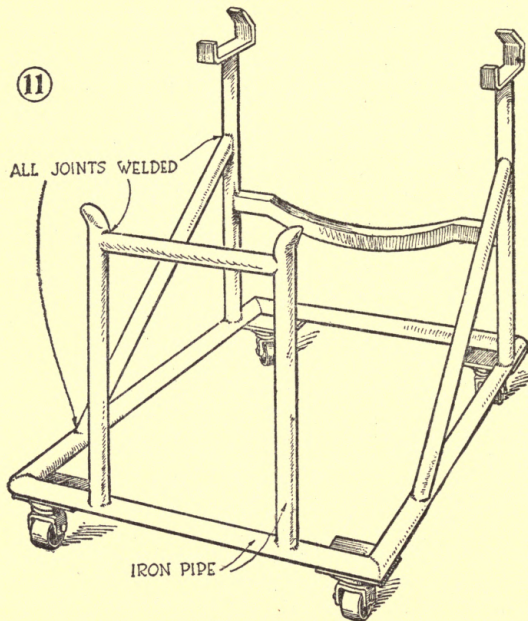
A metal engine stand made from iron pipe welded at the joints. It answers the same purpose as the wooden one shown in Fig. 9 but it is lighter in weight
